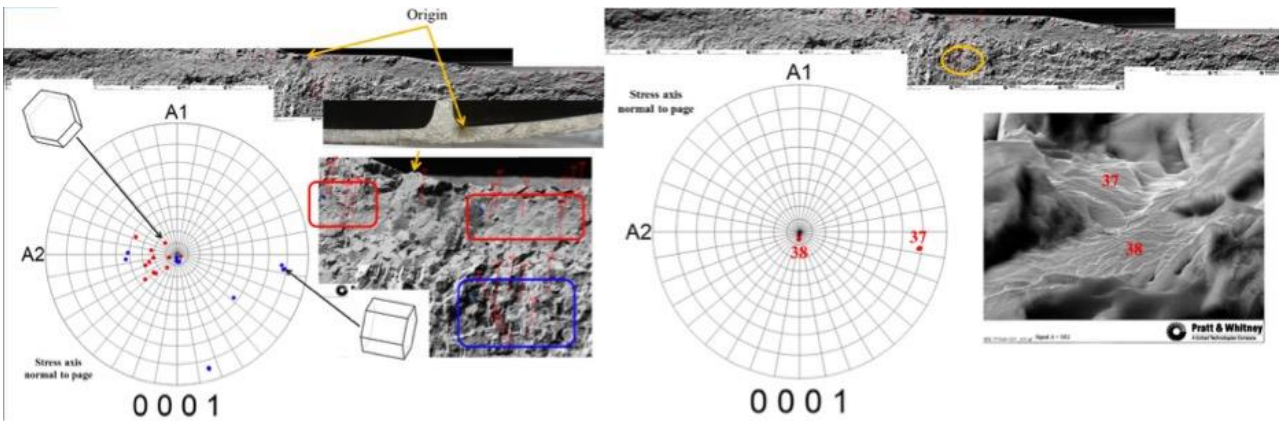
EBSD analysis directly on fracture surface of PW4077 fan blade out event
